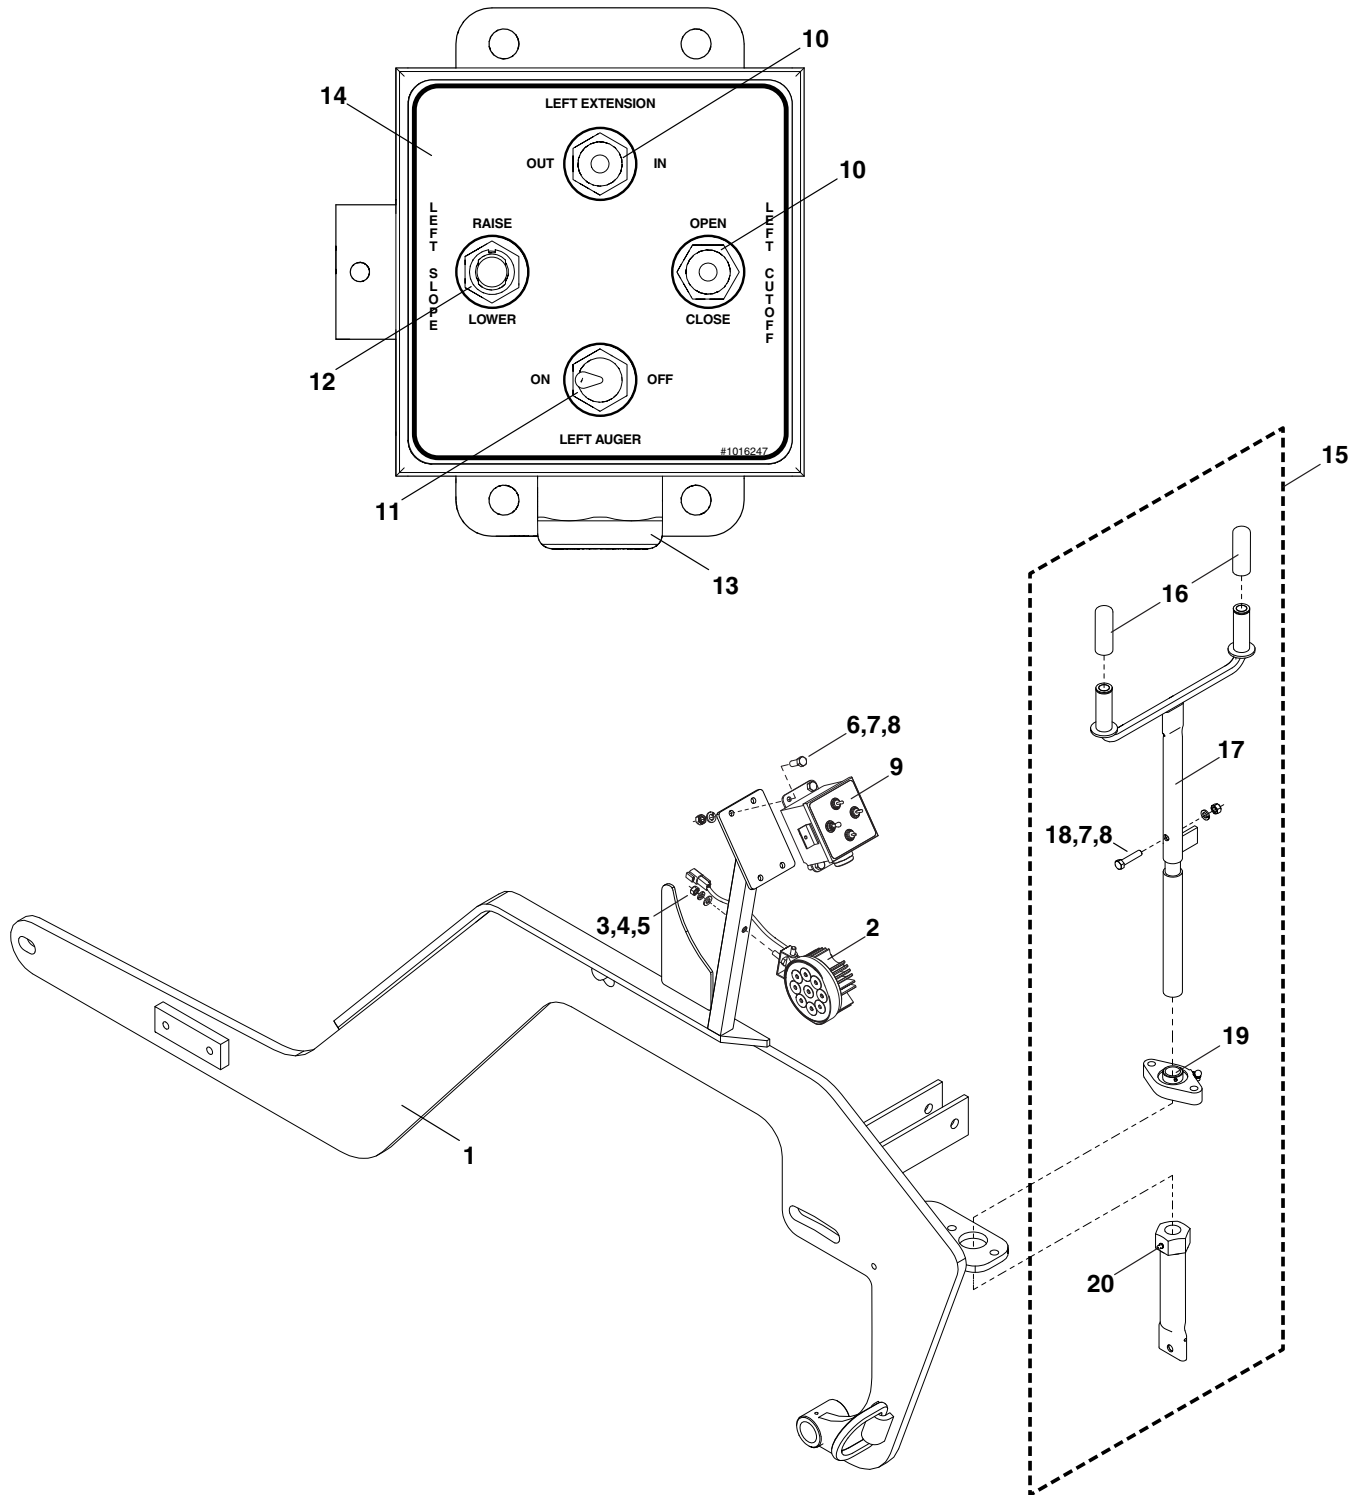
Option - Legend Screed Pull Arm Assembly - Left
